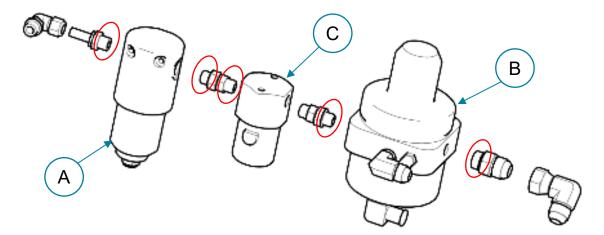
Exploded HP filter (A), supply solenoid valve (C), and pressure regulator (B) subassembly. NOTE: Inspect and Jubricate O-rings on component port fittings (circled): replace if pecessary
